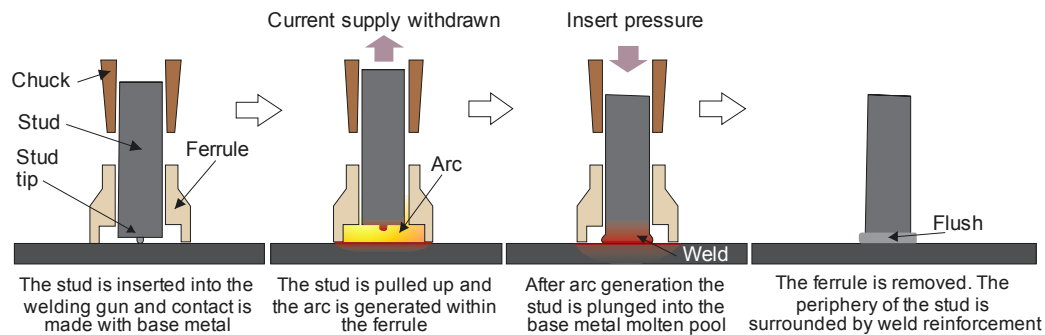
Welding operation sequence for draw arc welding with ceramic ferrule [5]
